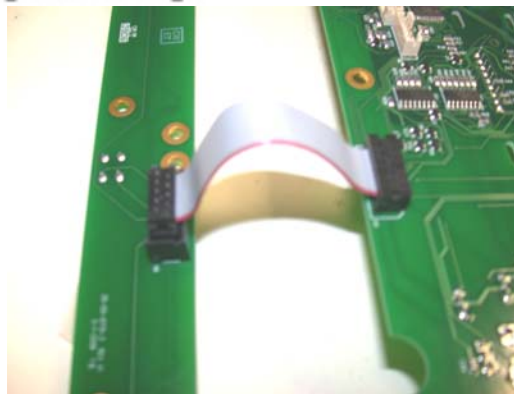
Picture shows the Ribbon Cable connected to Footswitch PCB and Main PCB.
